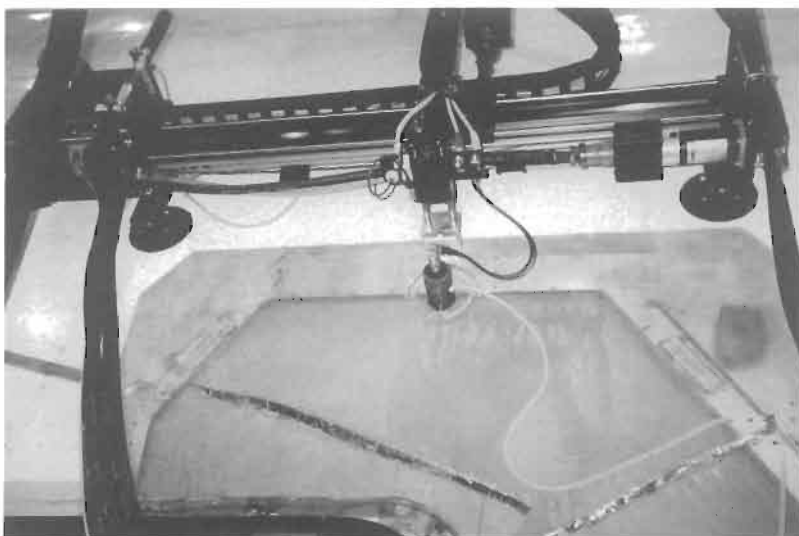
Ultrasonic scanner system inspecting a tapered region of the L-1011 door corner doubler.
